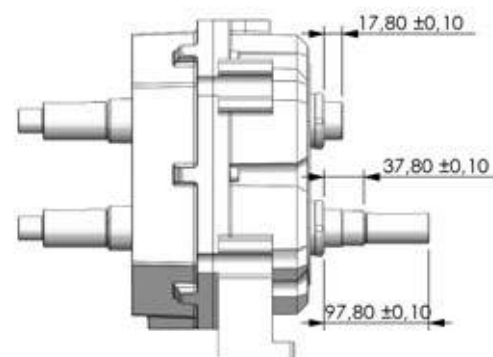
Assembly of gearcase and measurements for bearings preloading (Version P-H).
